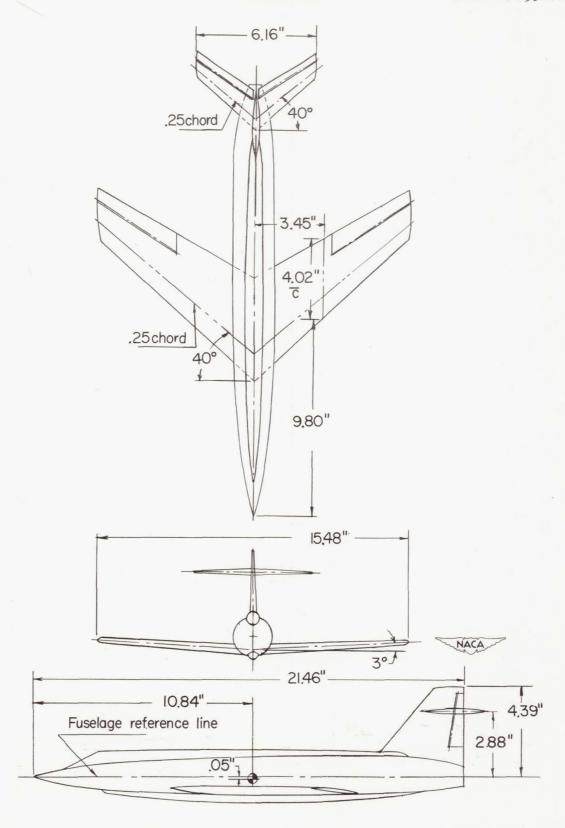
Three-view drawing of model B without chord-extensions installed.
